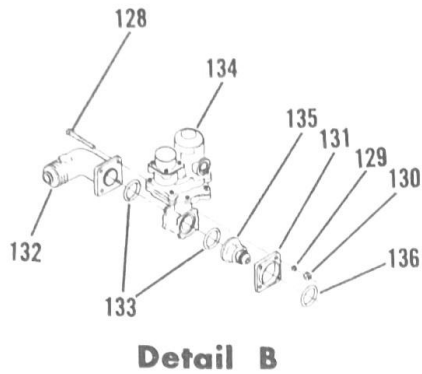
Tailcone Hydraulic Installation (Sheet 1 of 4)
